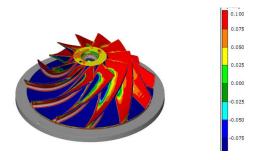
Dimensional analysis of an impeller with no detachment of piece from machine tool.
